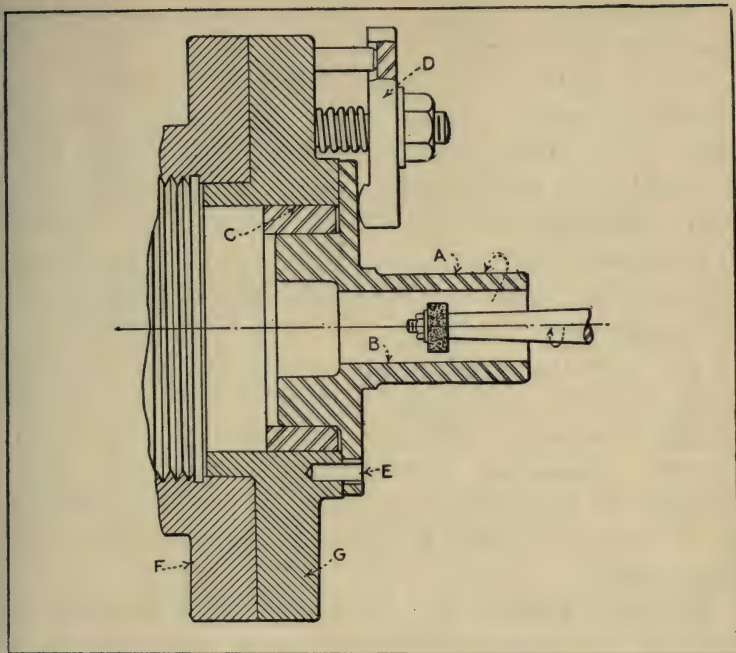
FIXTURE FOR INTERNAL GRINDING A BALL-BEARING CAGE on an expanding arbor and the surface, C, is ground in the correct relation to the hole, B. The fixture used for grinding the hole, B, was originally made up for boring and turning, but was later adapted to the present use. Since the fixture was made up for a heavier variety of work than a grinding operation, the clamps shown at D are much more suited to a turning operation than they are to a grinding fixture; so, also, the driving pin shown at E would usually be considered unnecessary if the fixture were made up for a grinding fixture. This example is given principally to show how a fixture made up
